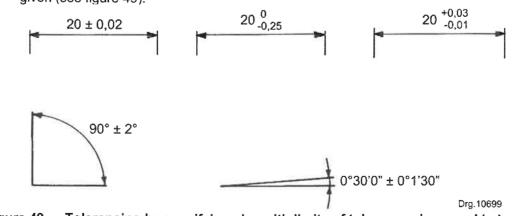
Tolerancing by specifying size with limits of tolerance above and below that size
